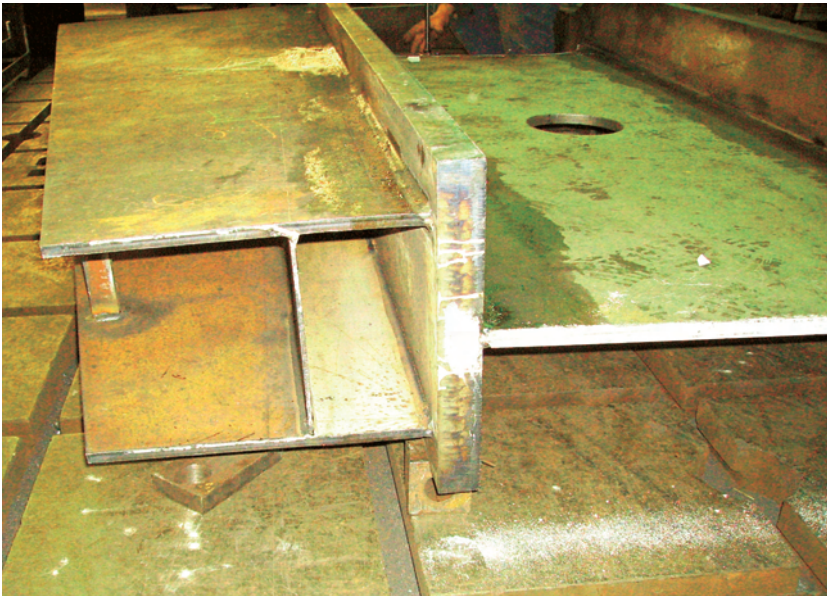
shows an example of WPQR for semiautomatic welding with solid wire in gas mixture shielding.
